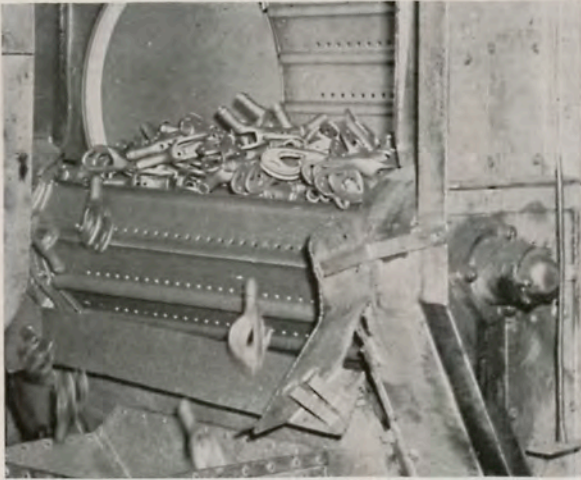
More than a ton of malleable castings are cleaned hourly in this Wheelabrator Tumbler.
